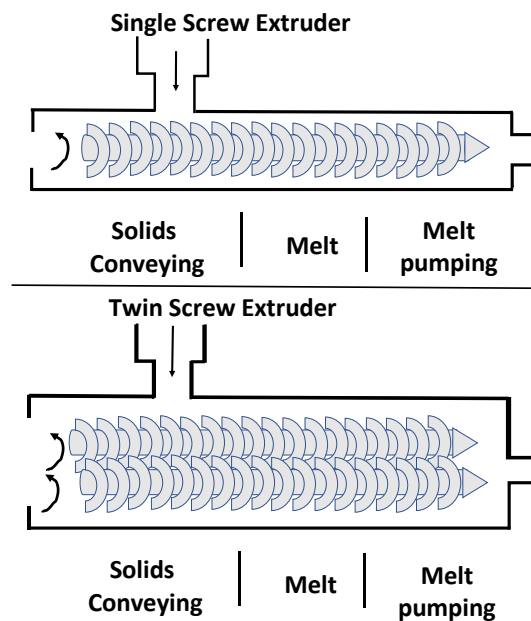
Cross-section of single and twin-screw extruders, adapted from (102).
